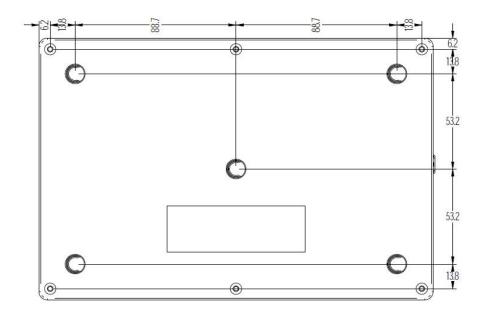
trID R1210I Technical Drawings - Back panel view
